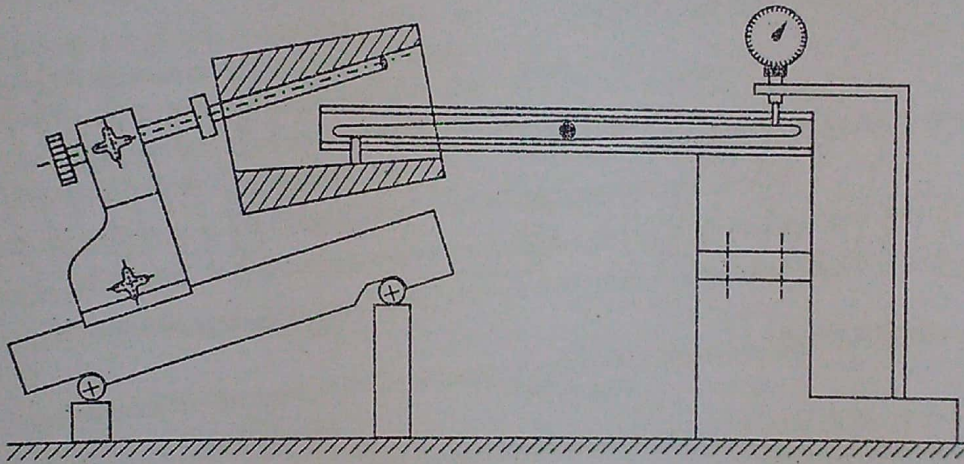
Set-up for measuring a taper hole on the sine table using internal adaptor.
